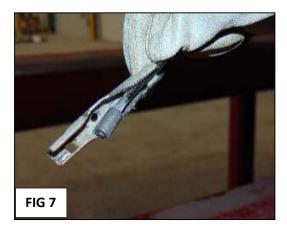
Rear retainer after being spread apart showing rear cable being removed. FIG 8:
